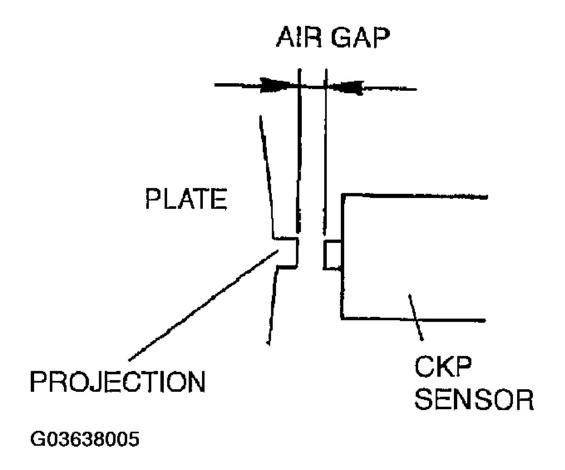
Adjusting Air Gap Between CKP Sensor And Four Projections On Plate Courtesy of MAZDA MOTORS CORP.
